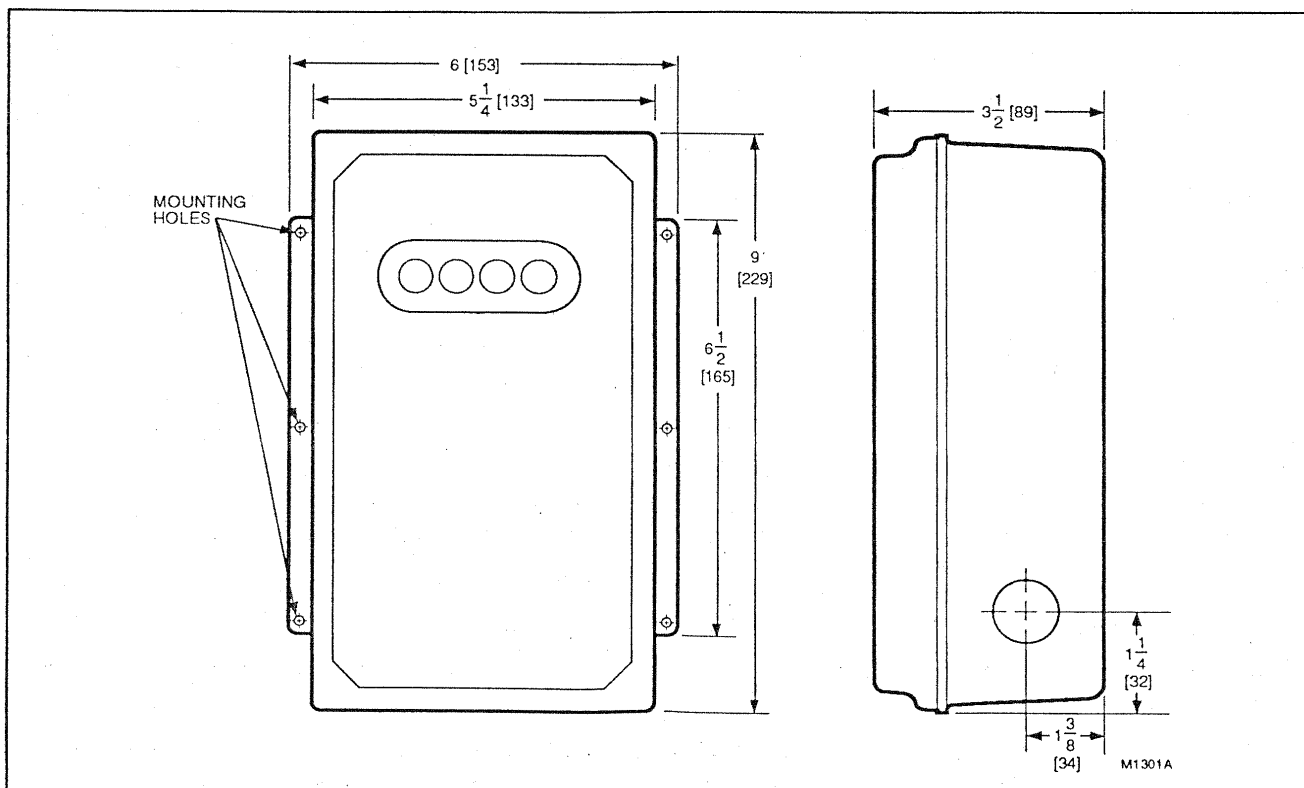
DIMENSIONS OF T775 IN in. [mm IN BRACKETS].
